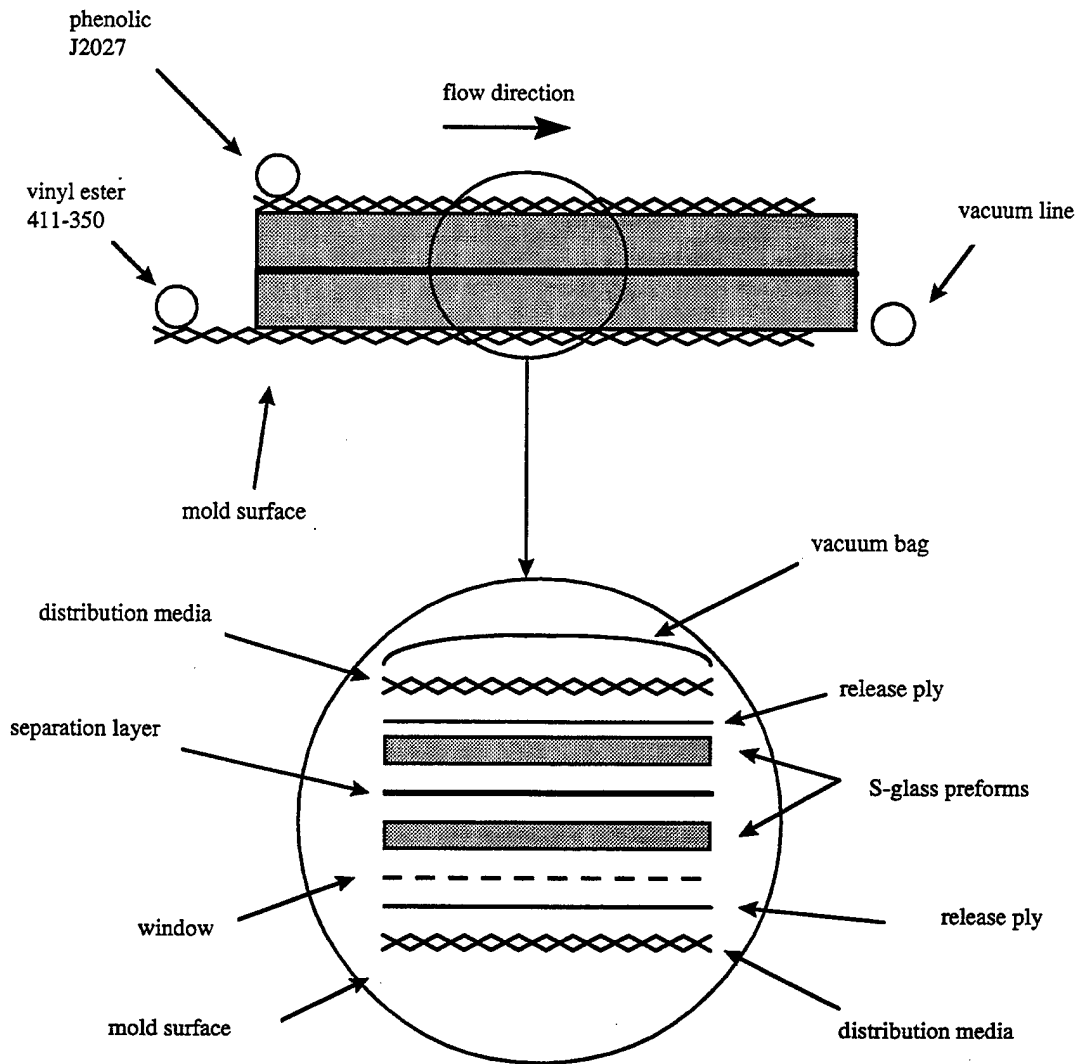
Experimental Setup Used to Manufacture Co-Injected Specimens.
